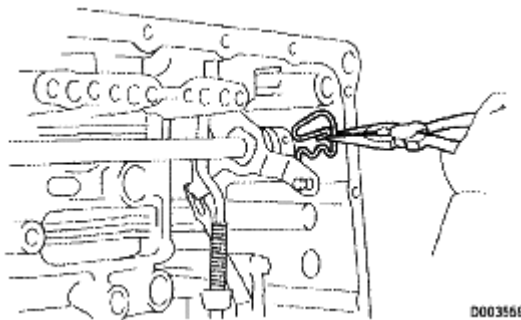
Removing Manual Valve Lever Shaft Retainer Spring
